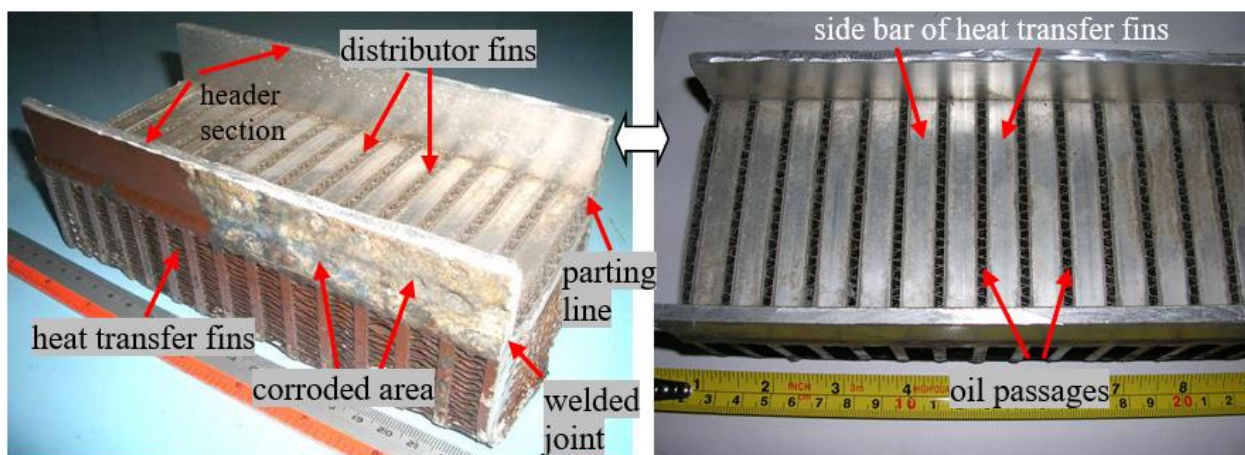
Close up view of the inside header port, showing several oil passages containing distributor fins and parting line of the weld joint between the header and sidebars/parting sheets
